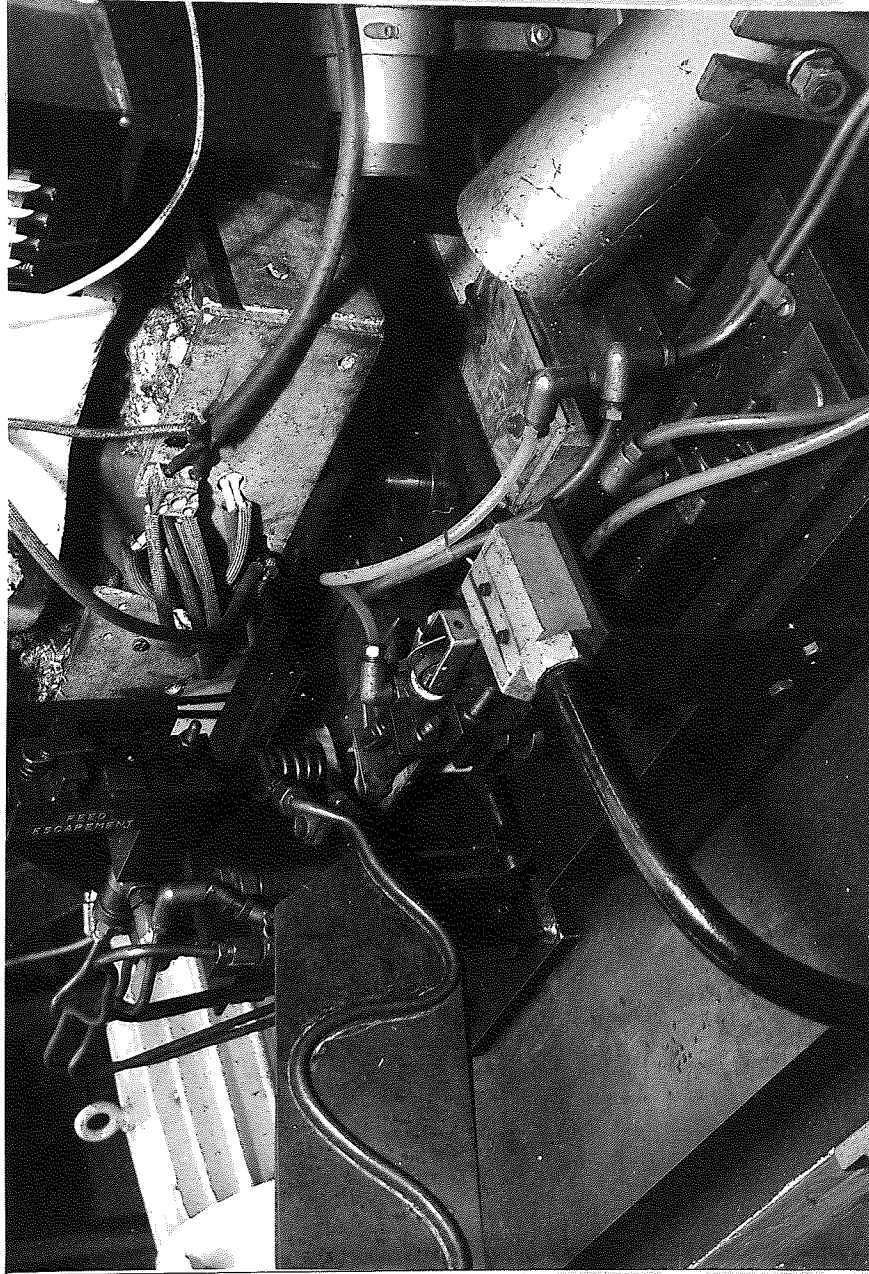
FORGING EQUIPMENT SHOWING BILLET IN POSITION ON DIE PRIOR TO FORGING
